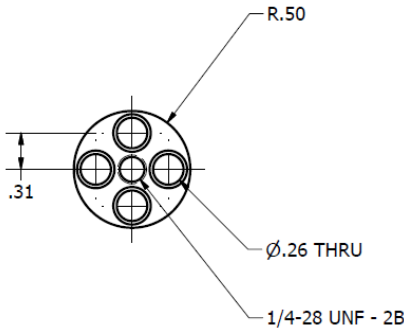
Overhead view of the multi-wire holder. Dimensions are indicated in inches and the part is constructed from Al6061. The length of this piece of irradiation equipment is the same as a standard single-wire holder, which is 73 cm.
